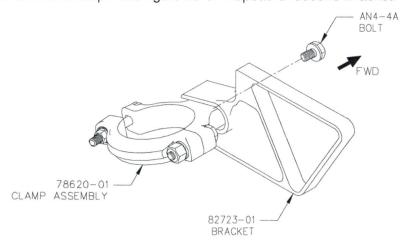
Clamp and Bracket Assembly (Right side shown, left side opposite)
